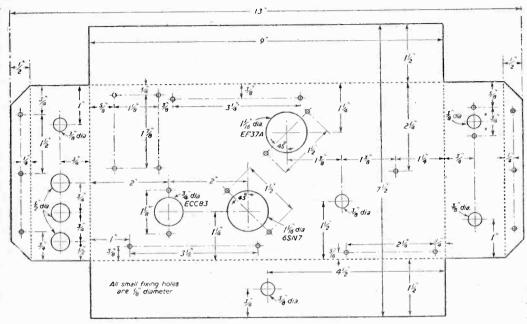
Chassis cutting and drilling details for the pre-amp.
